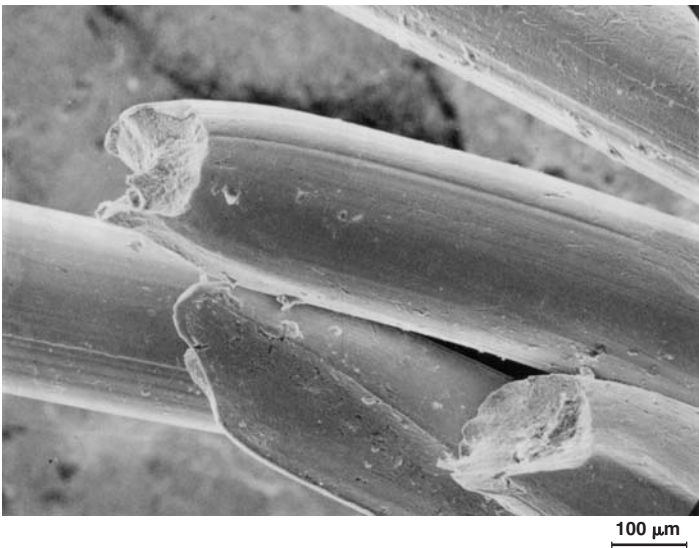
Some of the wires failed in tension, showing cup and cone fracture
